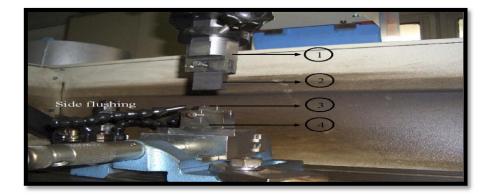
Sample of EDM figure. (1) tool holder, (2) electrode, (3) workpiece, (4) workpiece holder Source: Hascalik and Caydas, 2007
